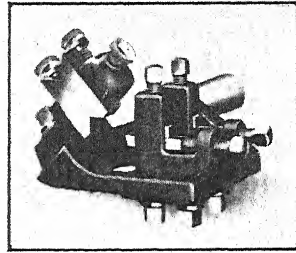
A V-Back-Rest Box Tool with Two Cutters for Taking Multiple Finishing Cuts.
